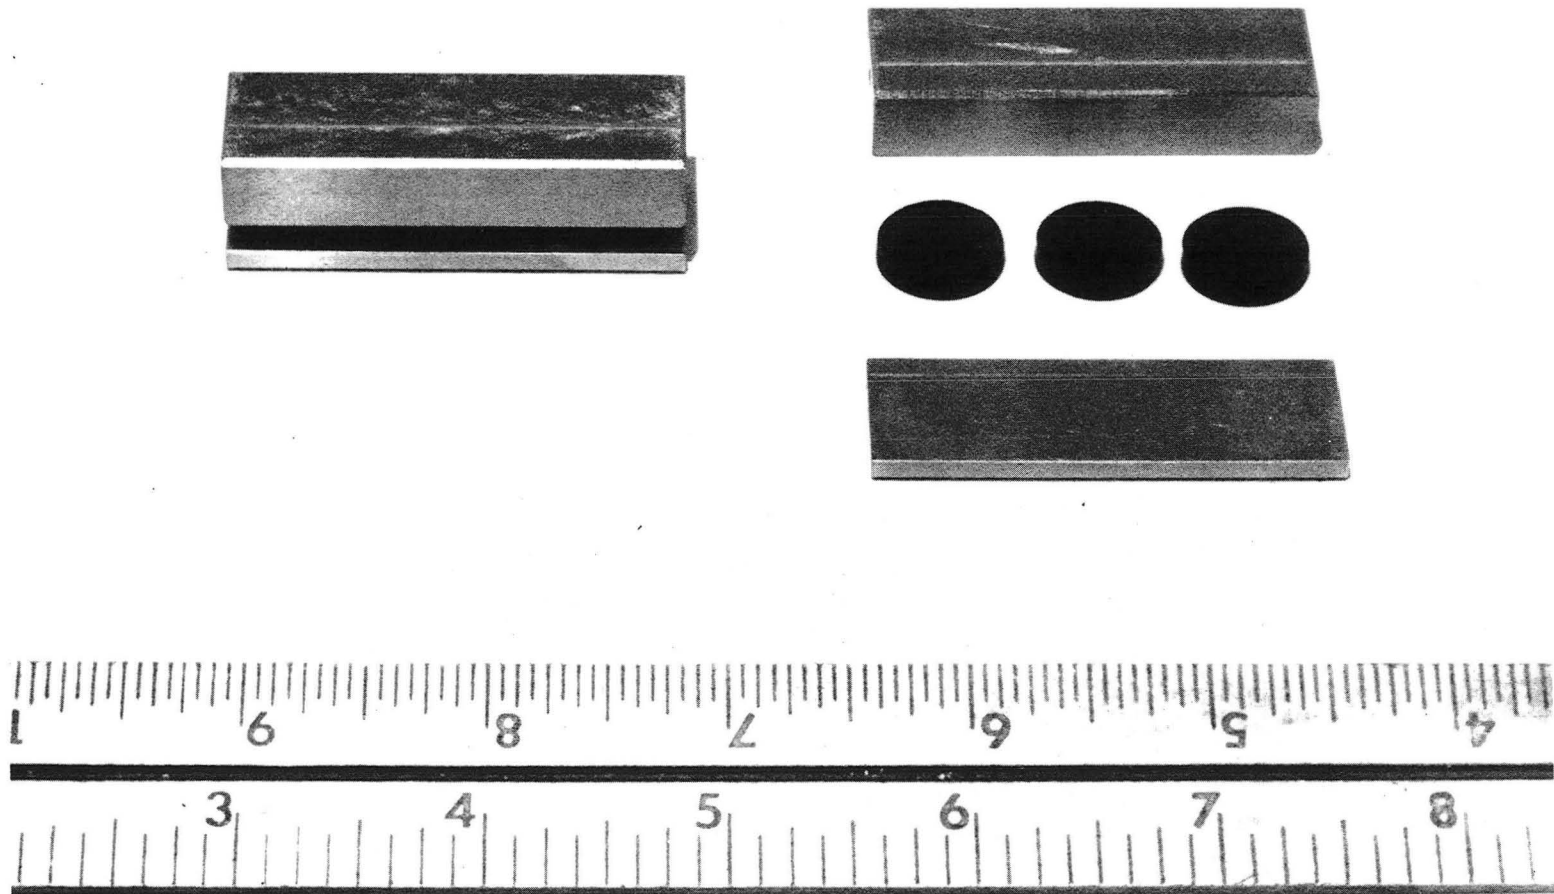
Detail View of Elastomer Cartridge During Assembly
